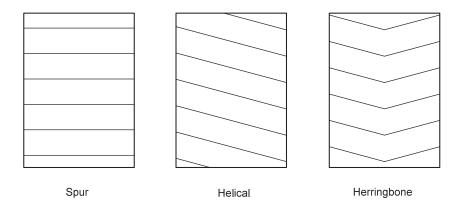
Diagram showing three commonly used gears in gear pumps; Spur, Helical, and Herringbone.
